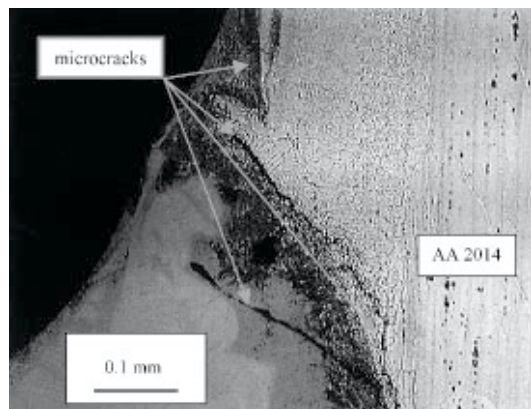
Micro cracks close to the aluminium side of an electron beam welded component.
